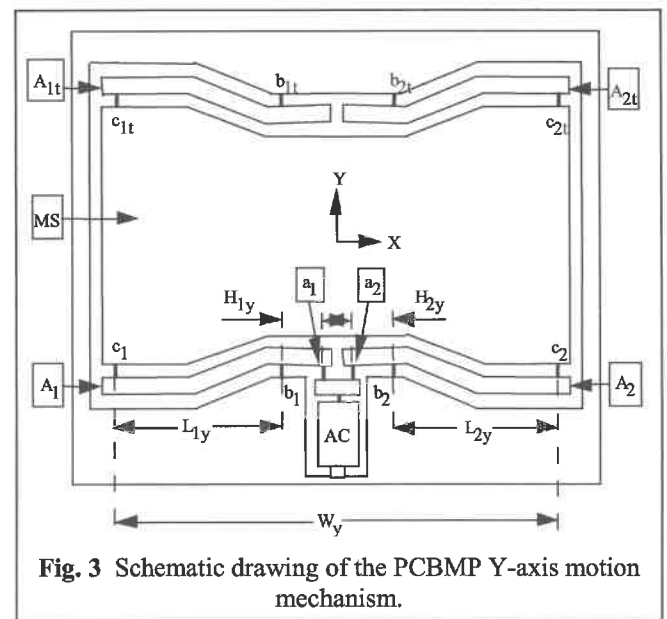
Schematic drawing of the PCBMP Y-axis motion mechanism.
